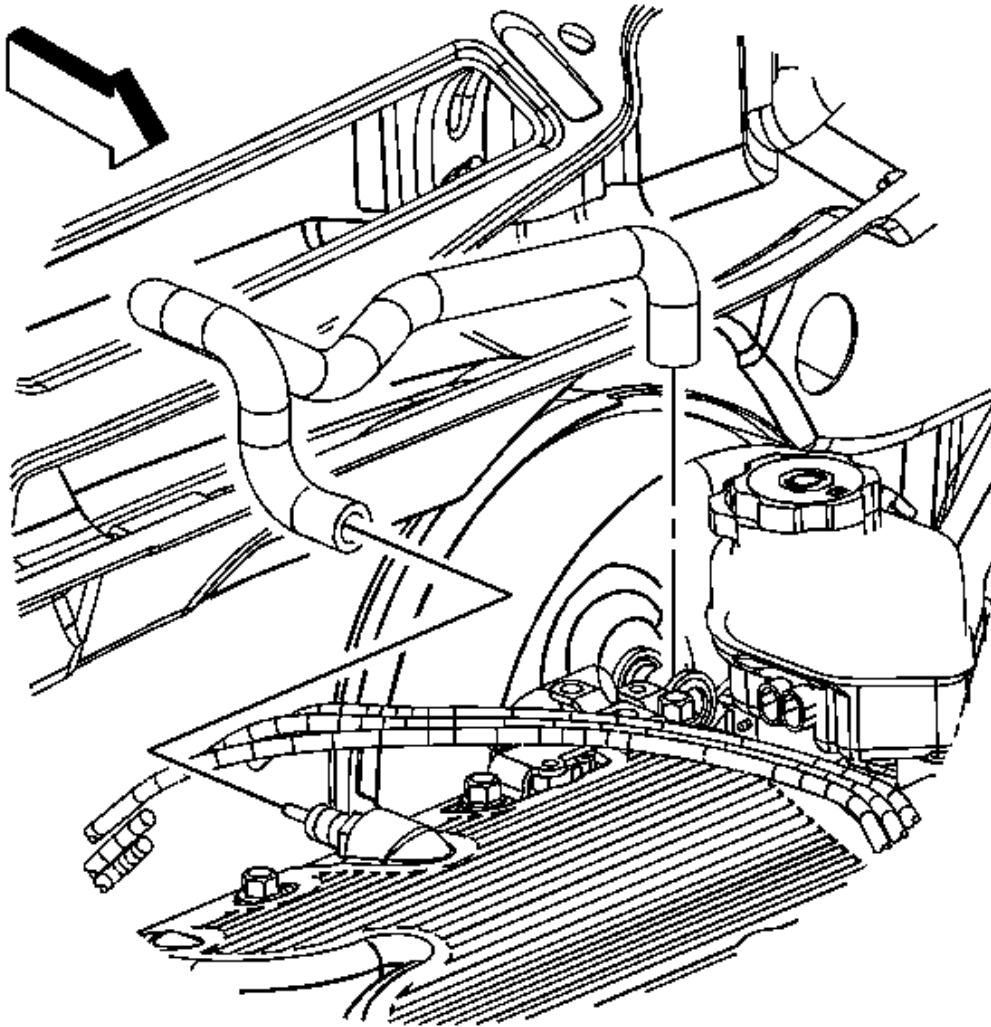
View Of Brake Booster Vacuum Hose & Intake Manifold
